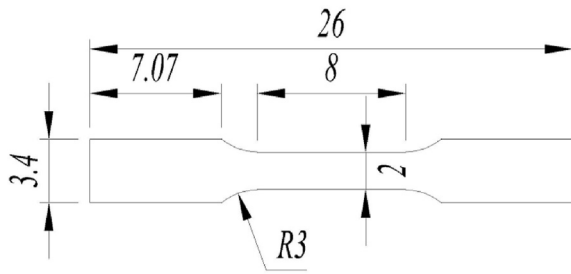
Dimensions (in mm) of the tensile specimens (thickness: 1 mm).
